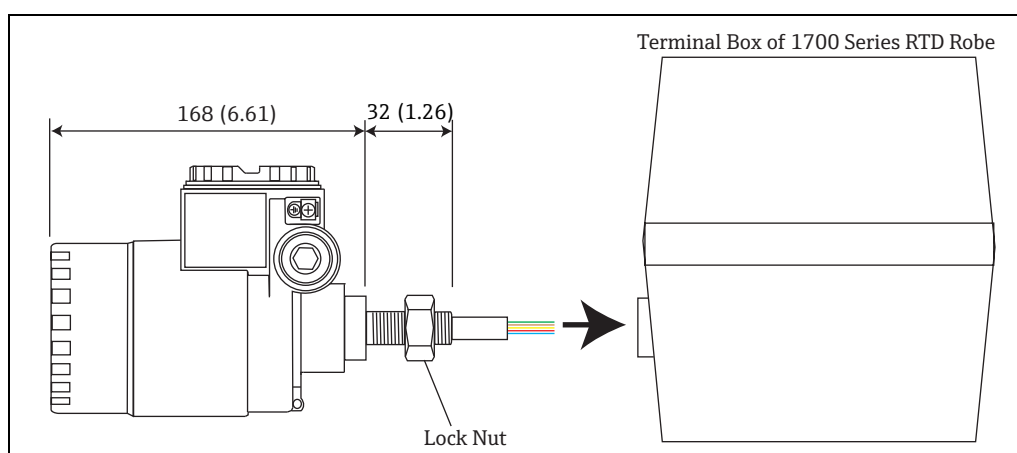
Type 2 Dimensions, Unit of Measurement: mm (in)
